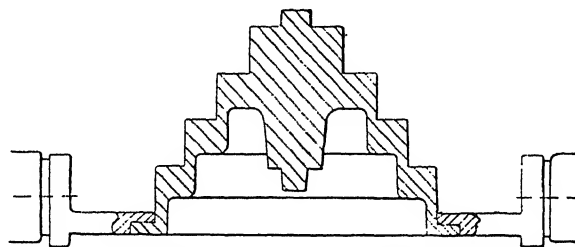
Iron Pattern mounted on the Turn-over Table of a Machine
